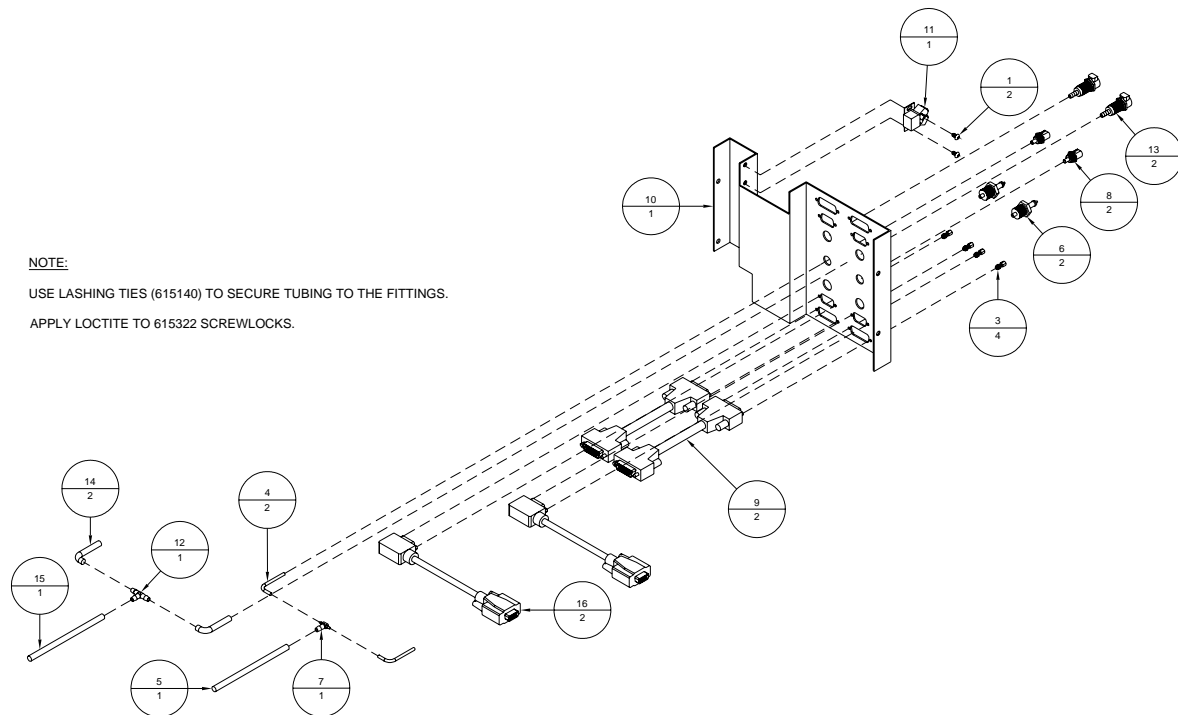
Terminal Bracket Assembly, Reverse (9101234A)
